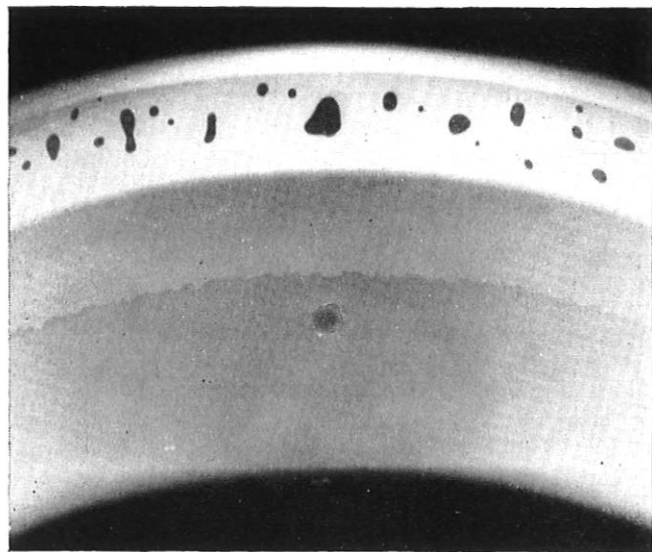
RADIOGRAPH OF BRAZED JOINT
